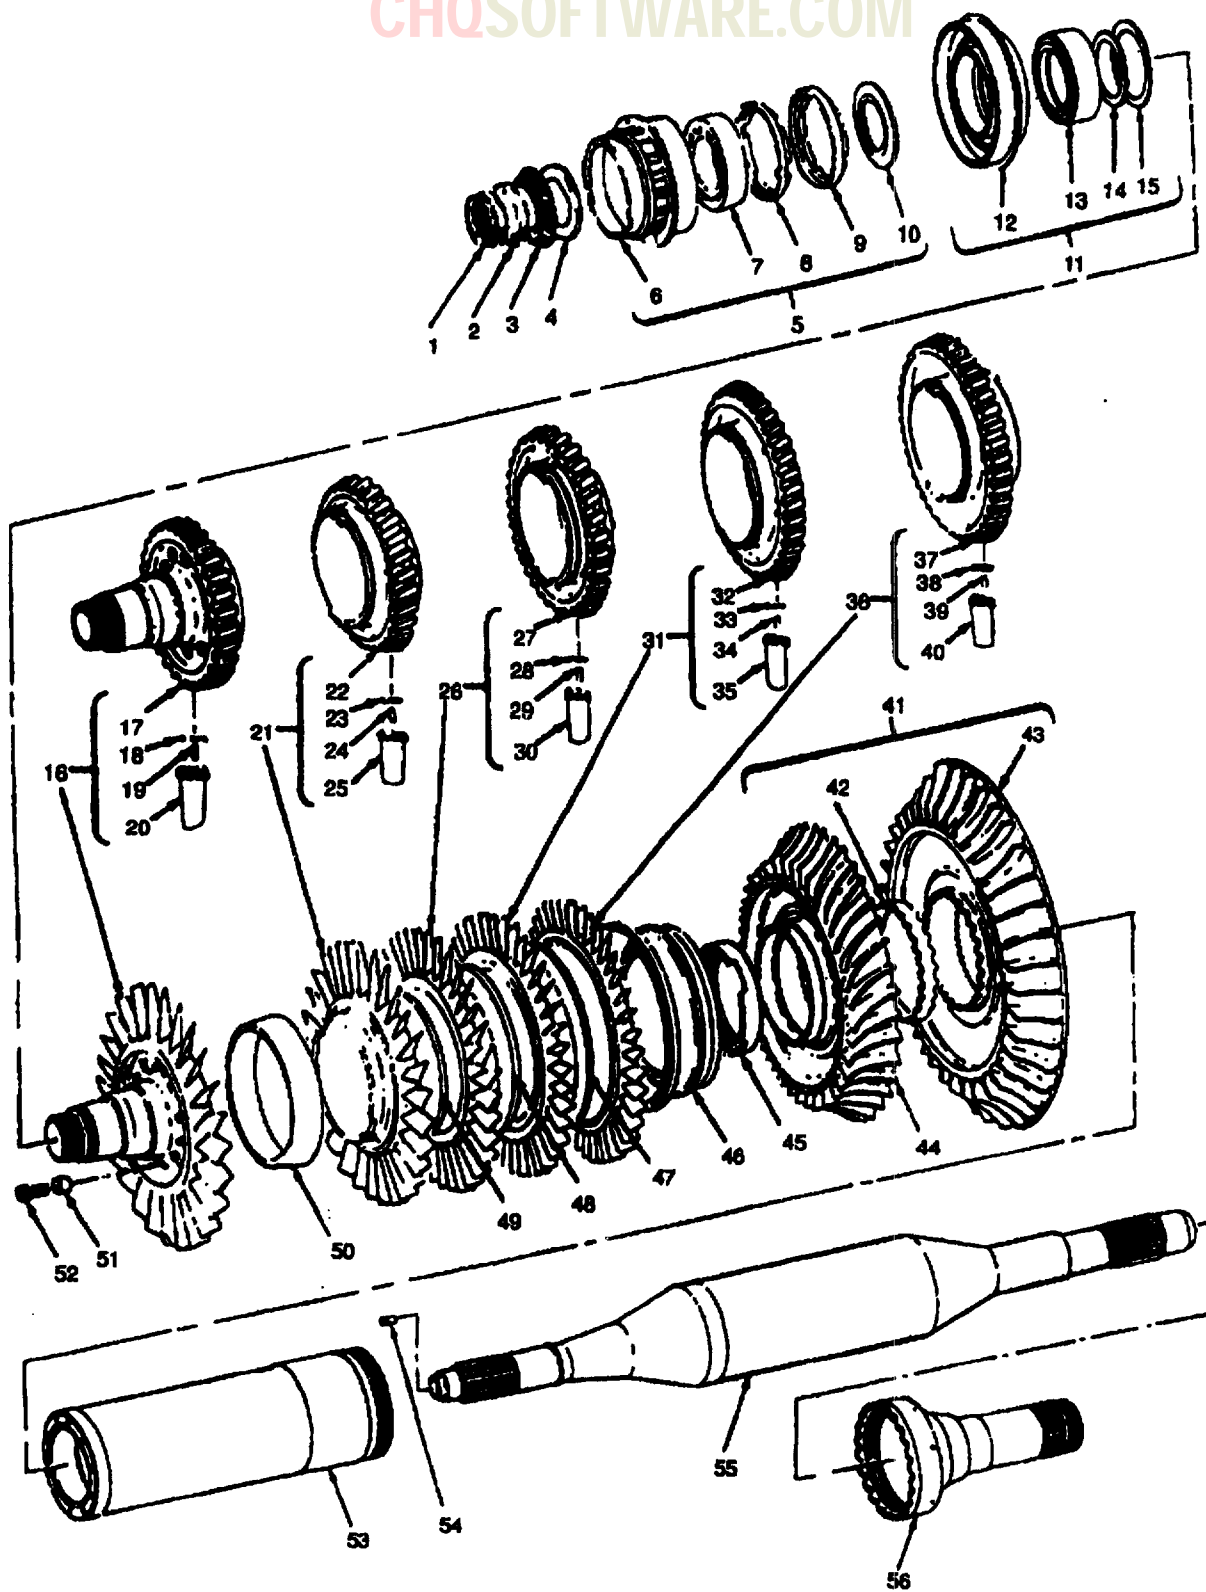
Compressor Rotor Assembly (T53-L-15, -701).
